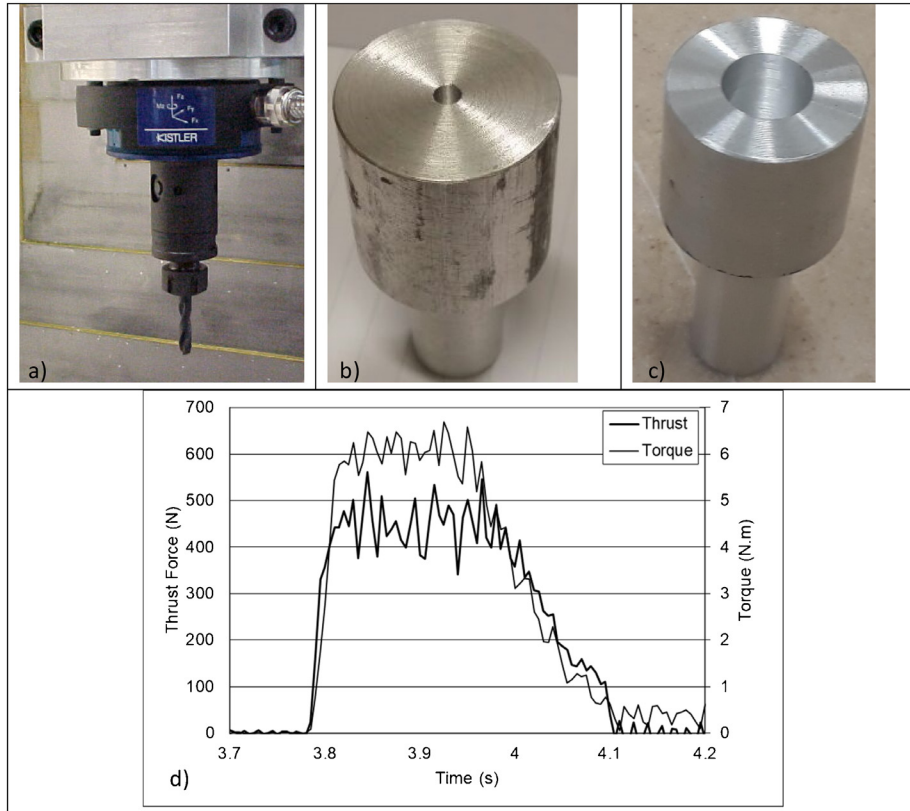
Photographs of (a) drilling set up, (b) Al 6061-T6 workpiece with a pre-cored hole (diameter = 3.5 mm), (c) fully drilled workpiece, and (d) generated torque and thrust force profiles.
